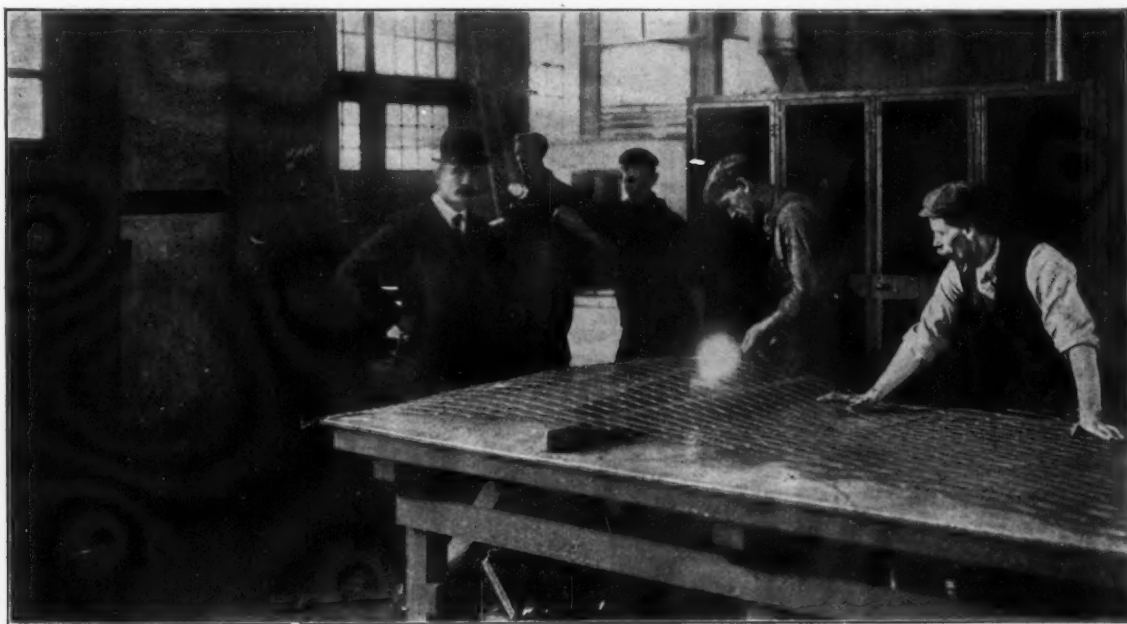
Repairing Breaks in Expanded Metal Concrete Reinforcement with a Davis-Bournonville Oxy-Acetylene Welding Torch.
